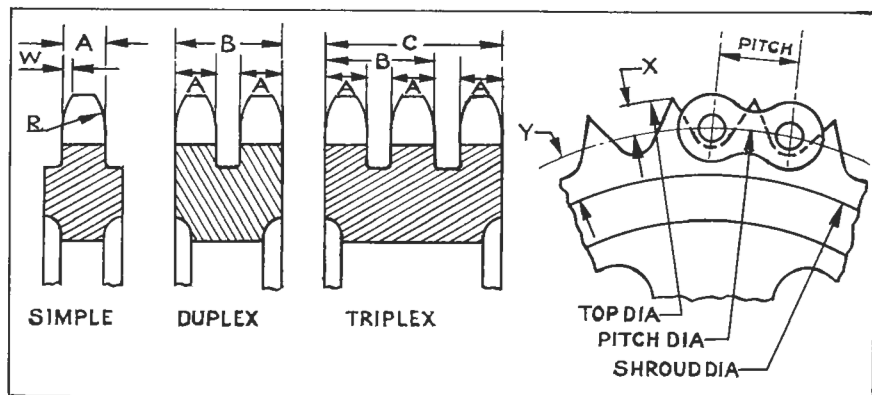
Roller Chain Sprocket Dimensions for British Standard Chains
